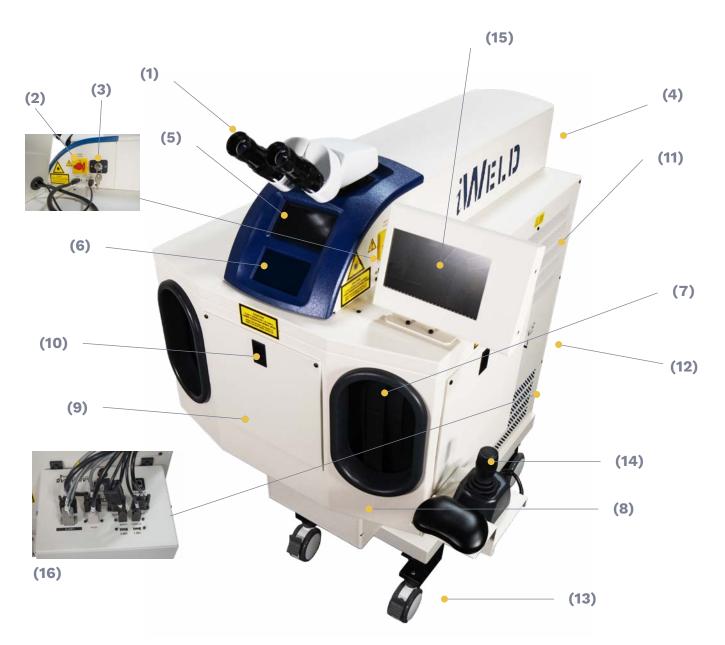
(iWeld® Industrial 1902-MFX Series Welder)
